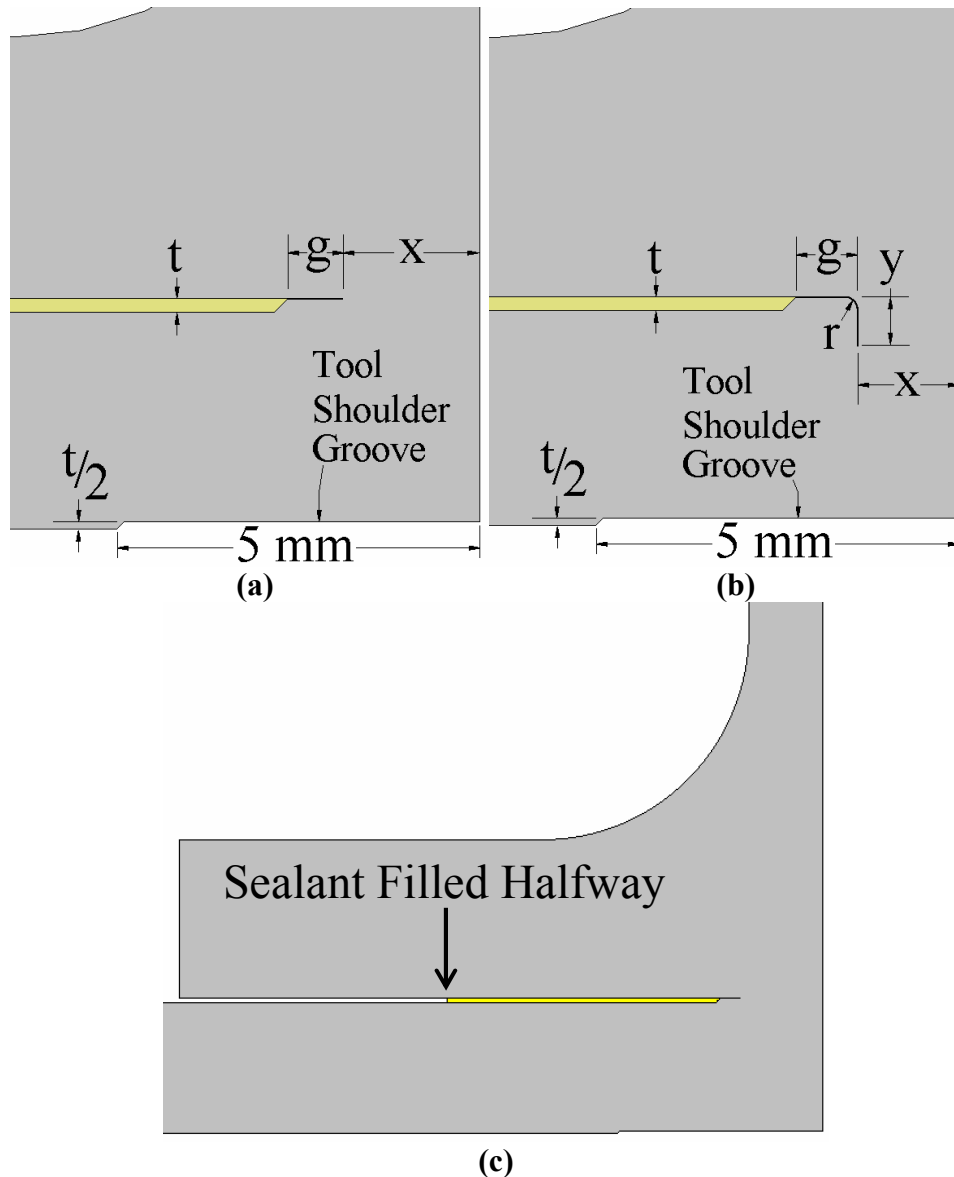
Geometry of crack tip for (a) flat and (b) hook models with complete fill sealant and (c) model for partial fill sealant.
